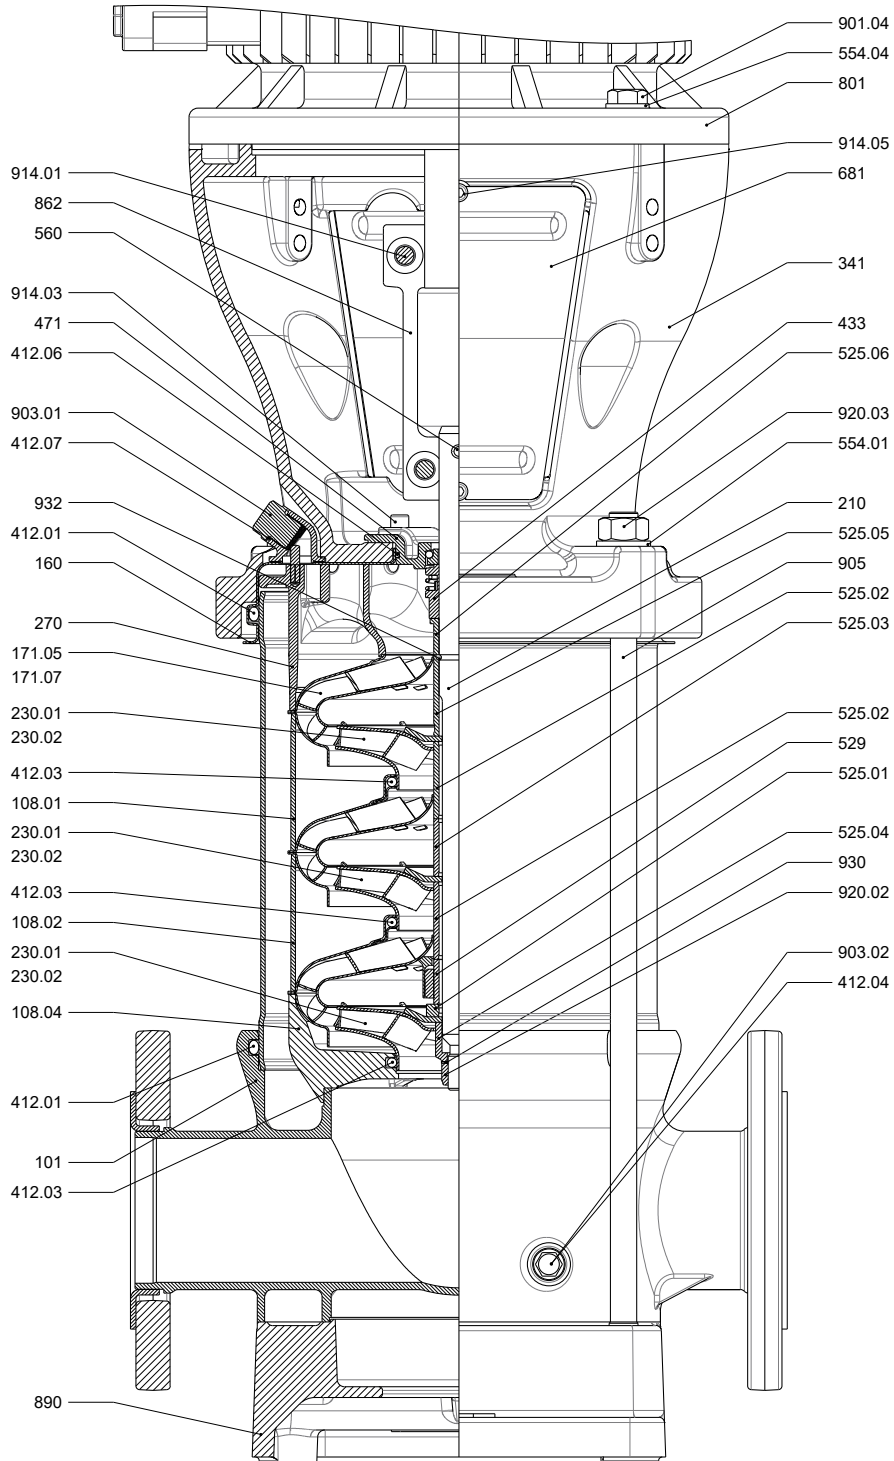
General assembly drawing DPV 40(L)B, 60B
